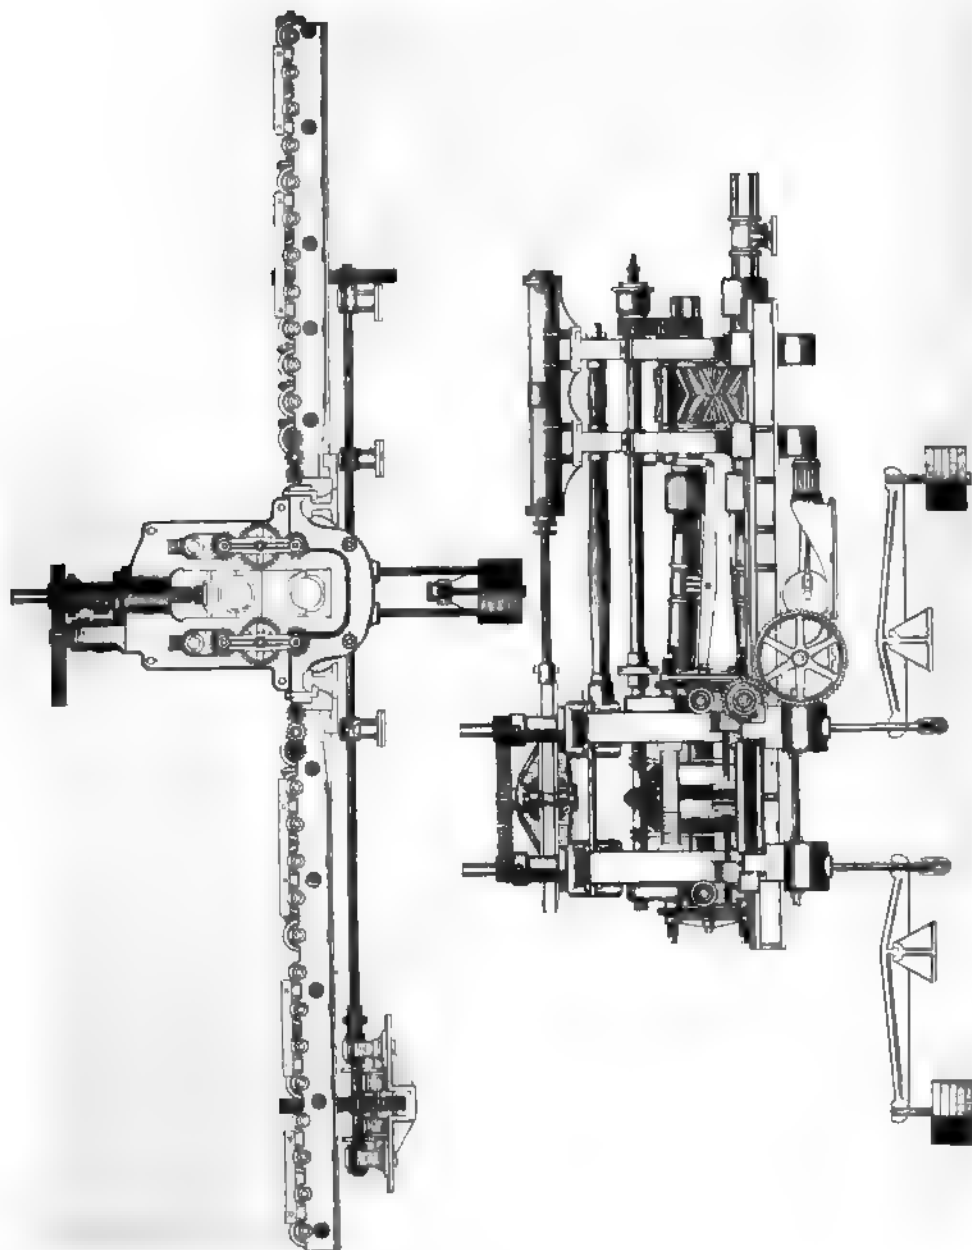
UNIVERSAL MILL—SIDE AND END ELEVATIONS.
